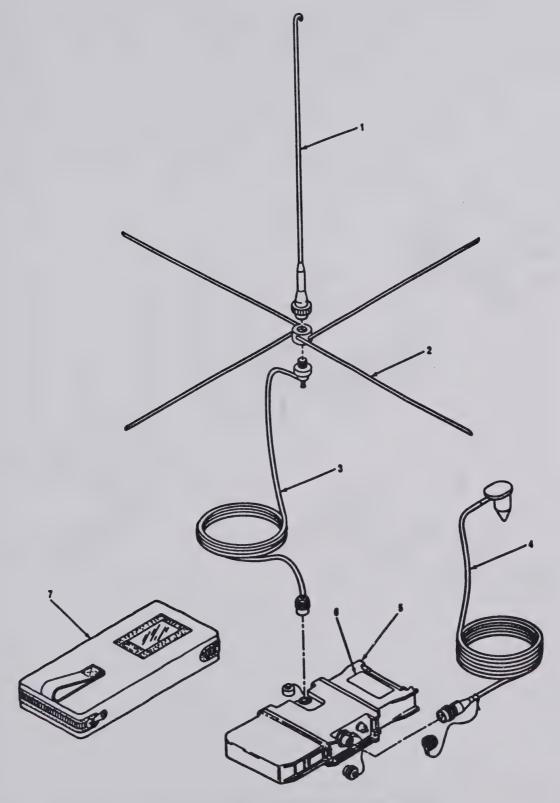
Sensor Set, DT-562A/GSQ (Sheet 1 of 2)
